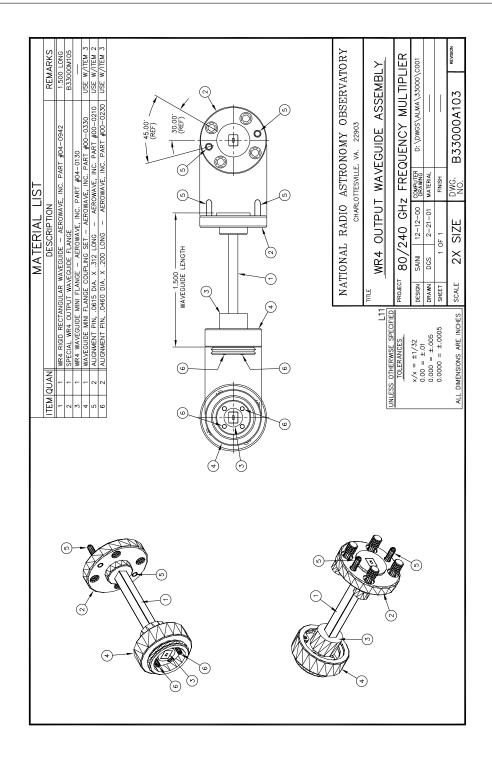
80/240 GHz frequency tripler, version 1 and 2: WR-4 output waveguide flange adapter assembly.
